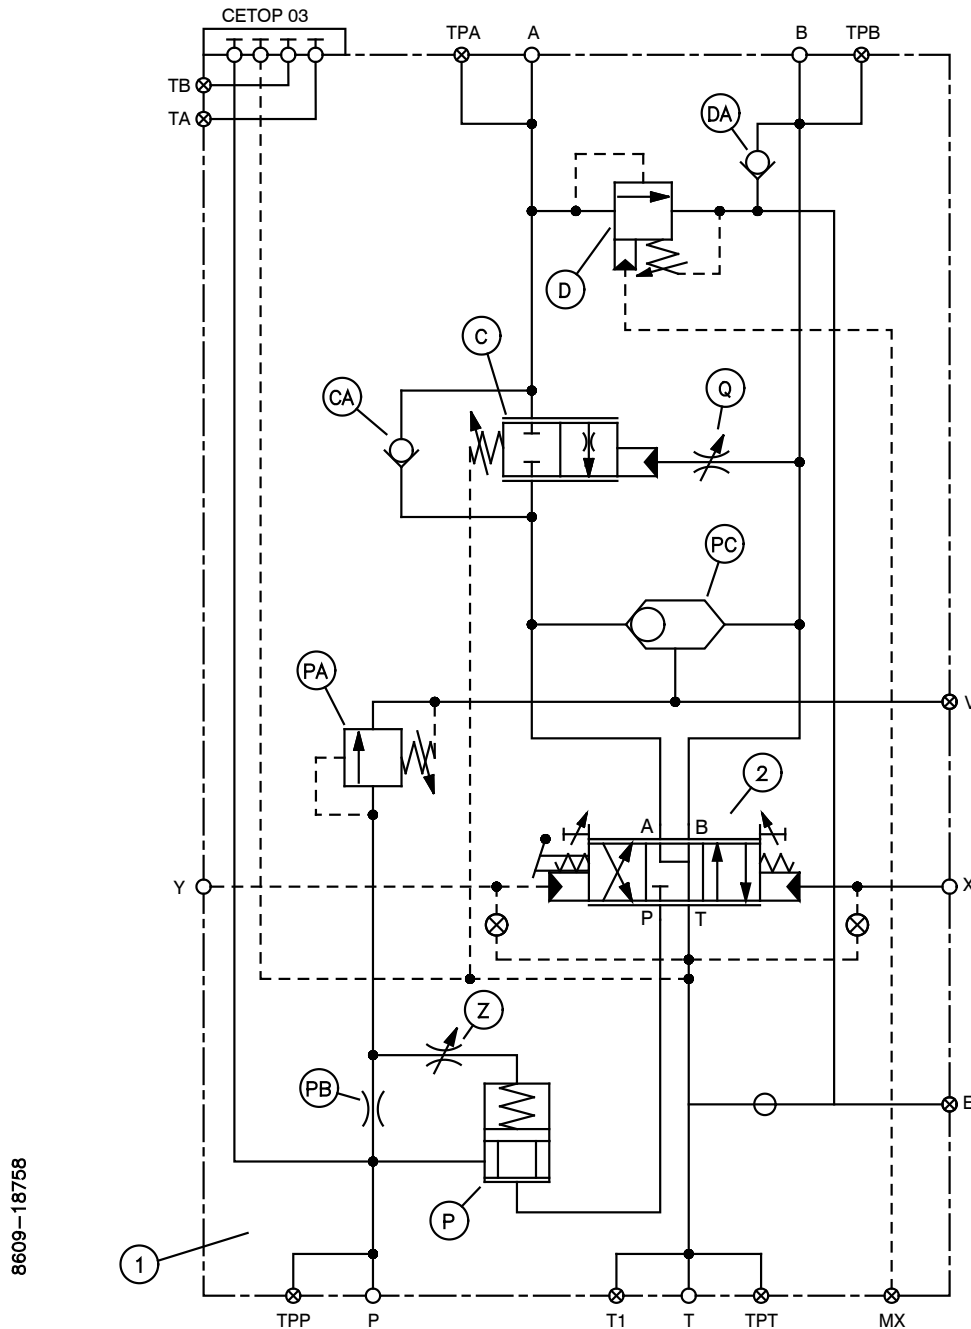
6MB Hydraulic Schematic (remote operated version shown)
